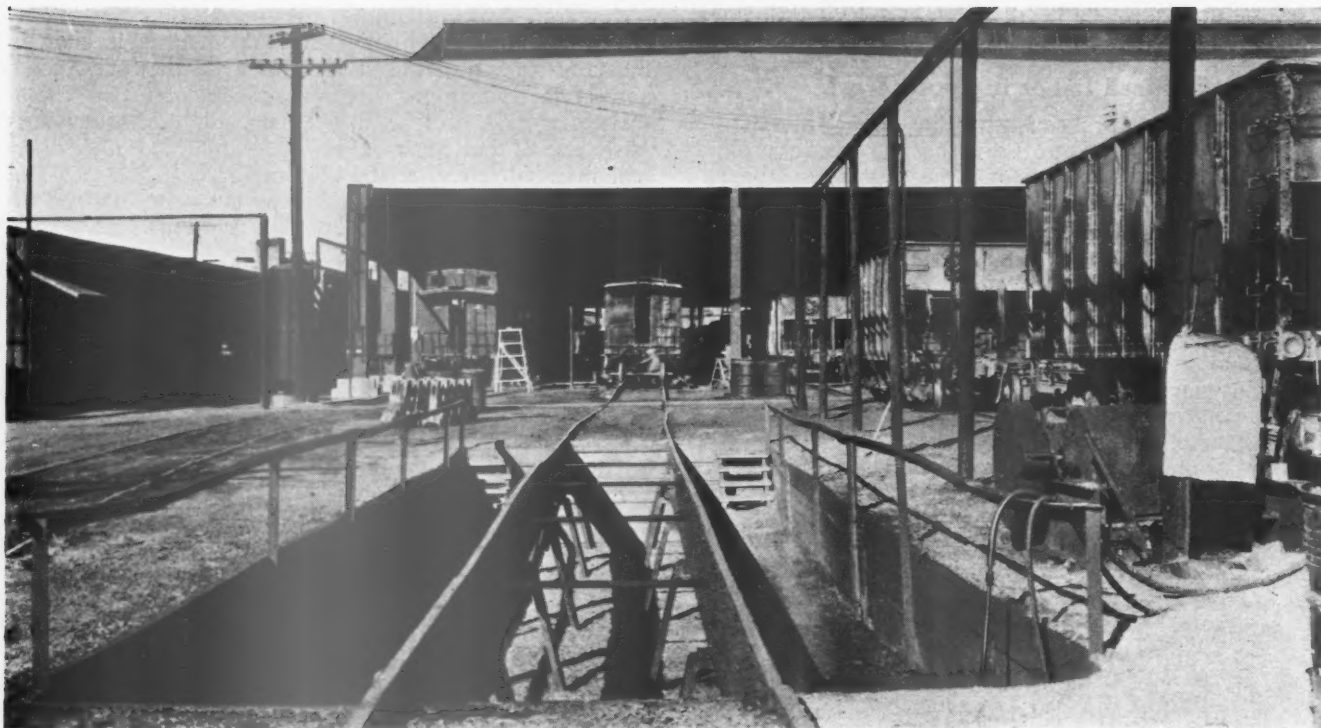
One of two large pits used in spraying the under parts of cars with car cement
